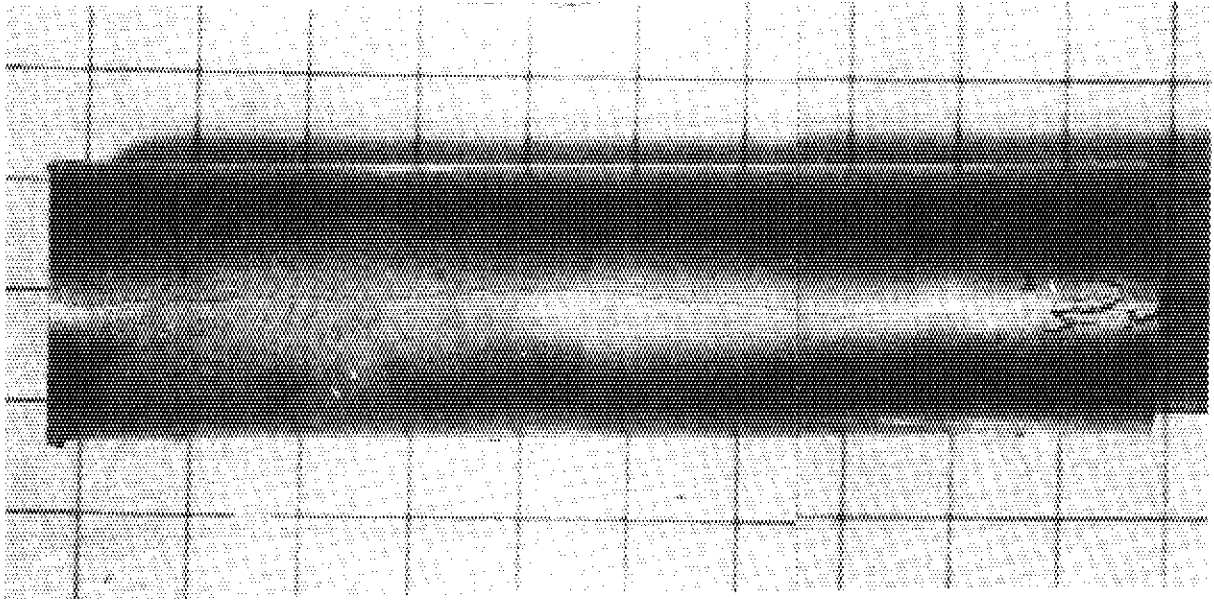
External view of Mo holder showing longitudinal hair crack.
